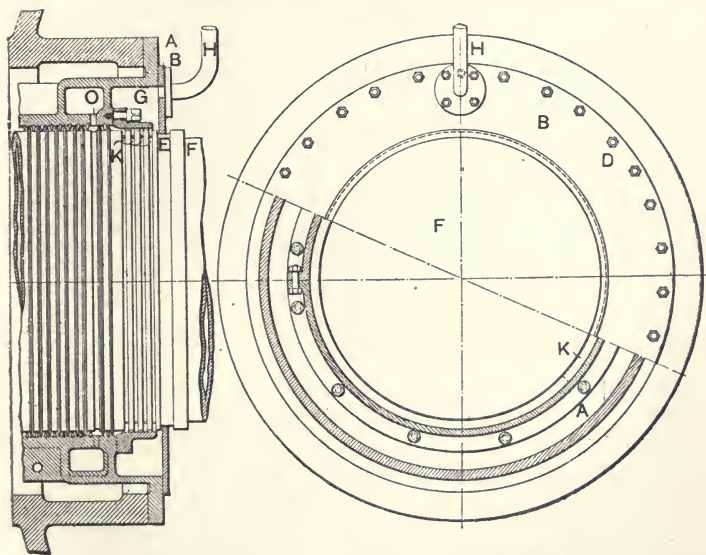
GLAND FOR SOLID SHAFT THROUGH END OF CASING IN "CARMANIA."
